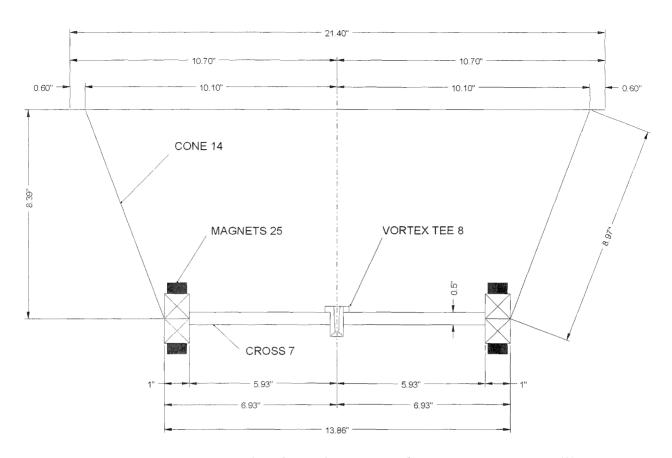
First stage breather and inner cone - lower wing cross-section (3)
